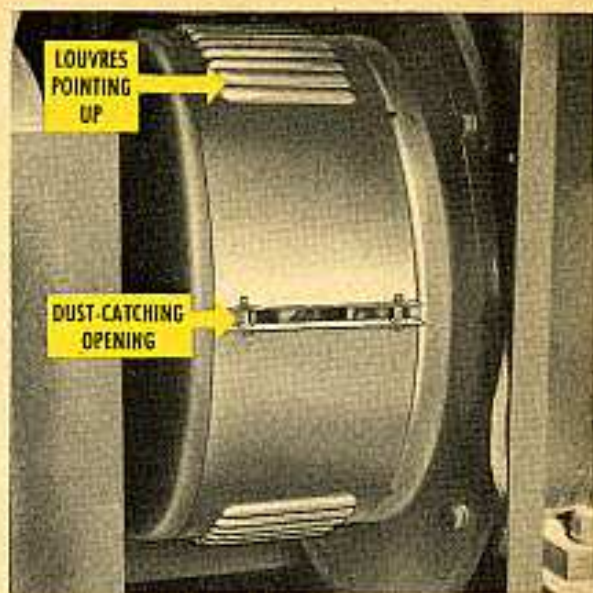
With louvres pointed up and an open space at the securing screw, dirt'll get in.
